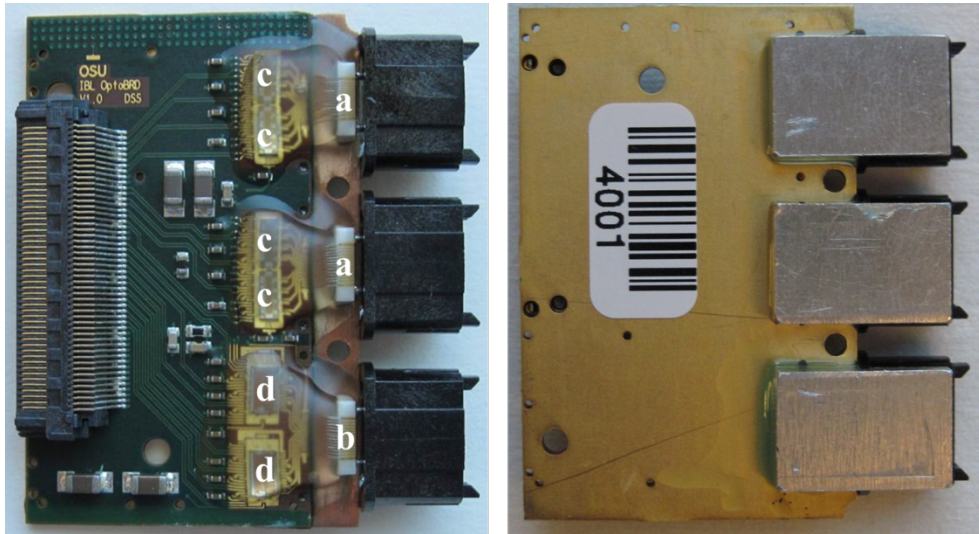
The left image is the top side of a fully assembled IBL opto-board: (a) VCSEL opto-packs, (b) PIN opto-pack, (c) VDC, (d) DORIC. The image on the right is the bottom view of the same opto-board.
